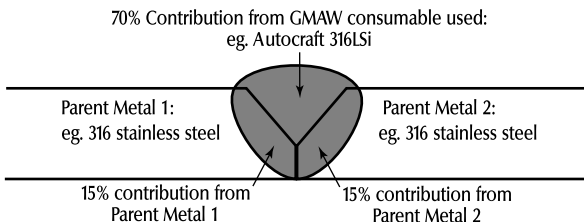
Example of 30% dilution in a stainless steel butt weld using the GMAW process with Autocraft 316LSi welding wire.
